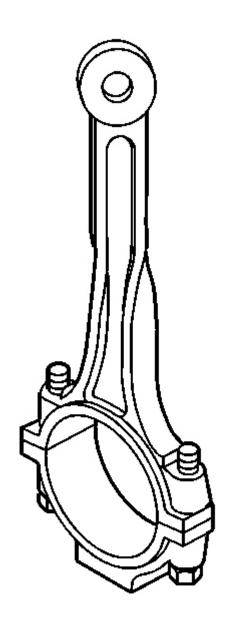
Identifying Twisted Connecting Rod Courtesy of GENERAL MOTORS CORP.
